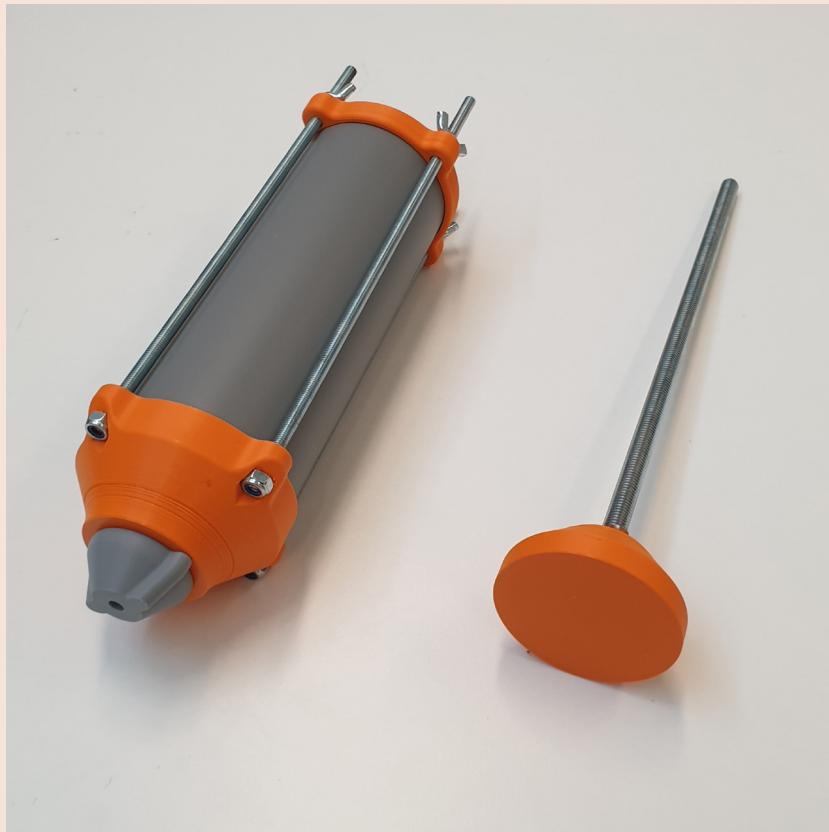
A clay extruder made of 3D printed parts, sewage pipe and threaded rod.
